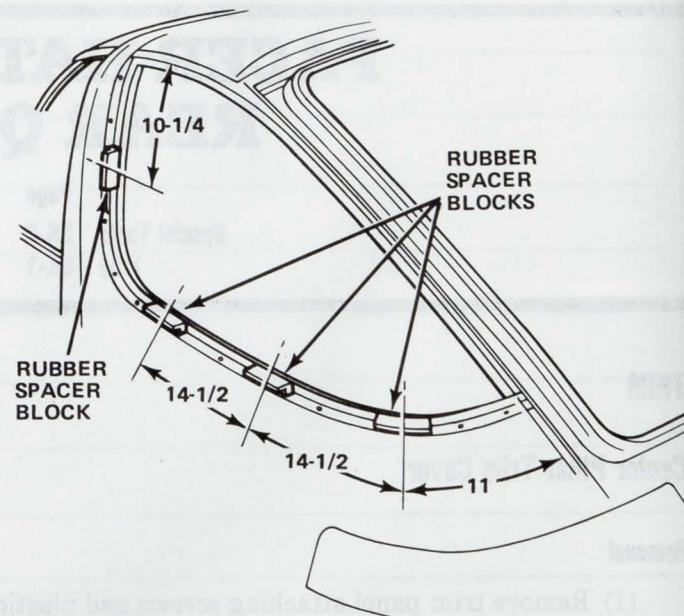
K-2 Installation of Rubber Spacer Blocks—Pacer (inches)
